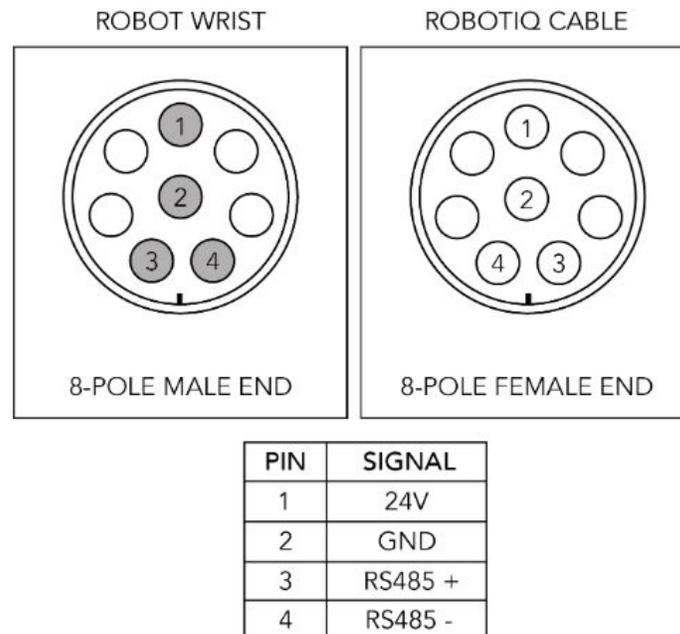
Pinout of the EPick Gripper cable-to-wrist coupling
